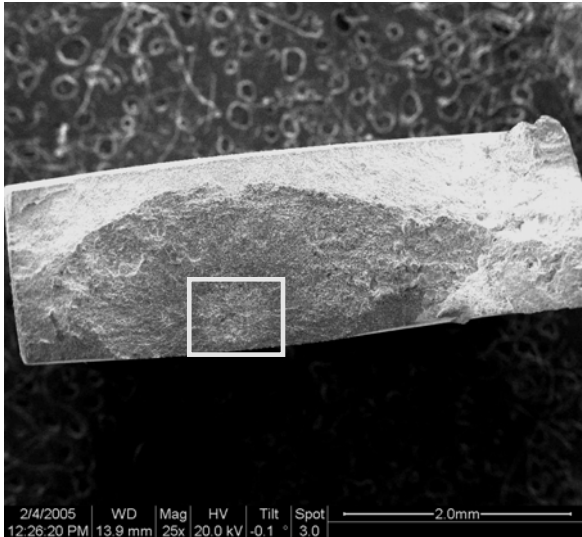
Specimen F/G-10, overall view of fracture surface
